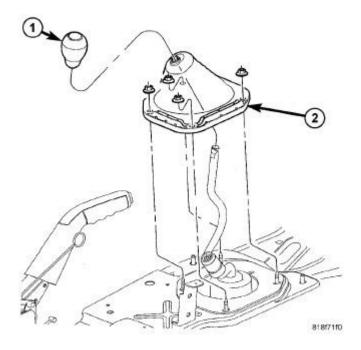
Shift Knob & Shift Boot Courtesy of CHRYSLER LLC
